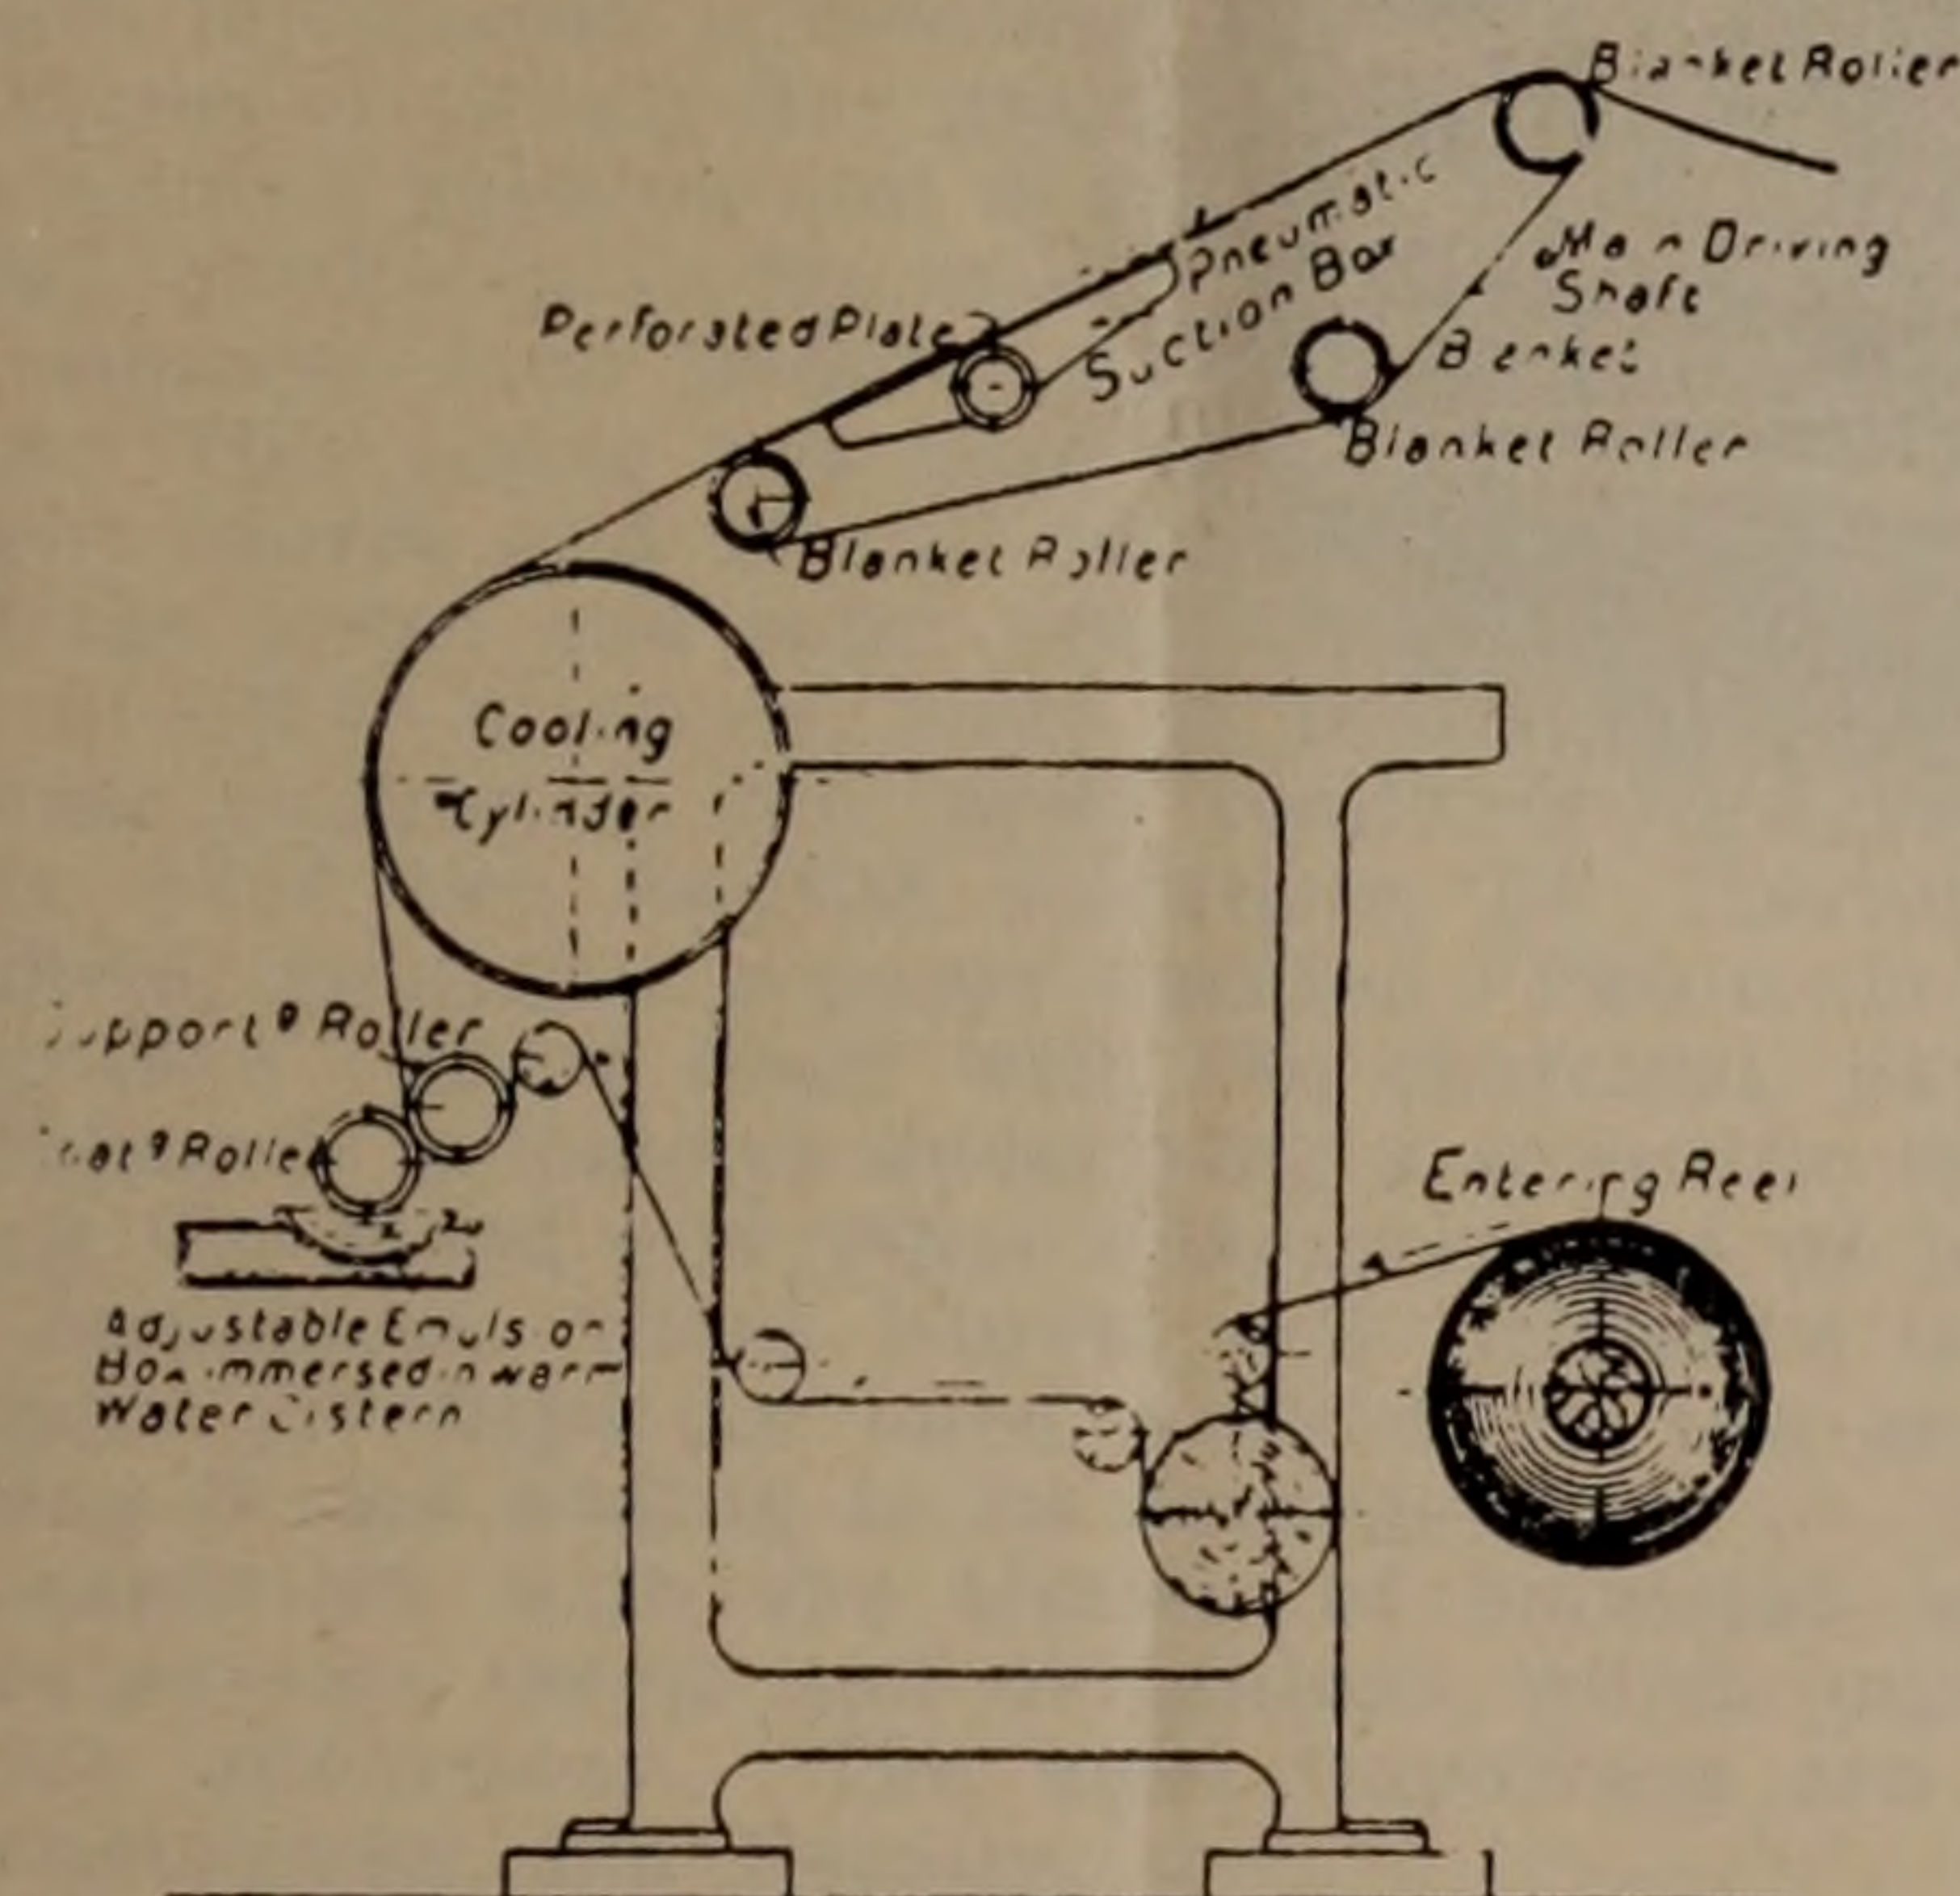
Diagrammatic Sketch of Coating Machine Head.
